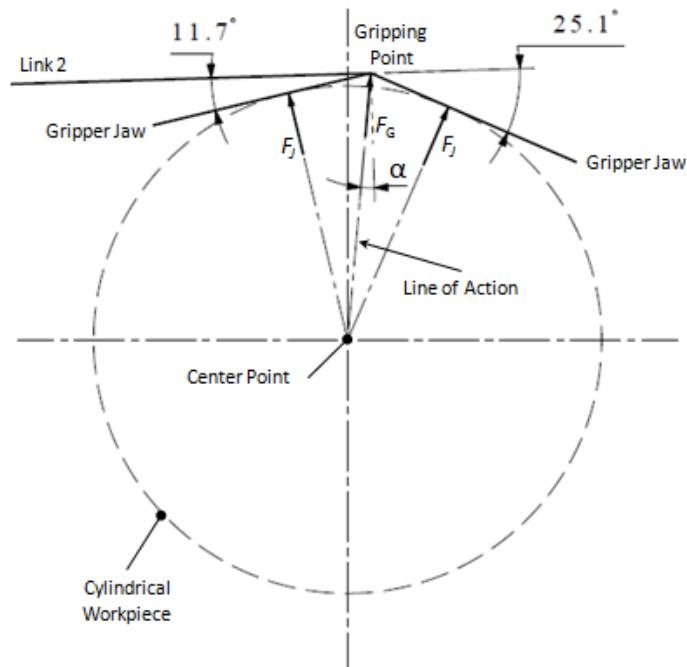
Line of Action for the Gripping Force on Cylindrical Workpiece.
